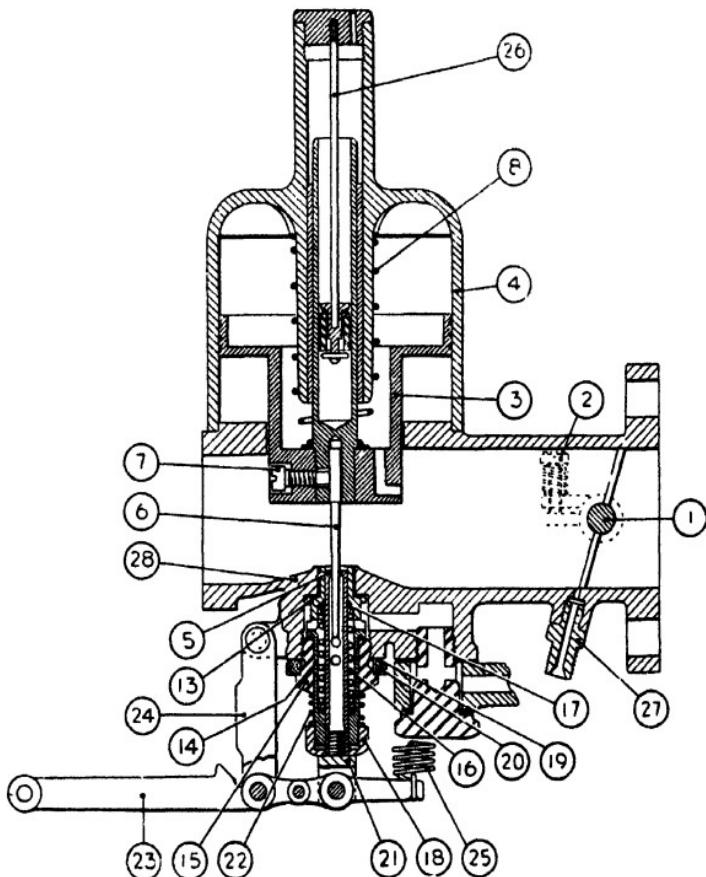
TYPICAL HORIZONTAL-TYPE S.U. CARBURETTOR.
